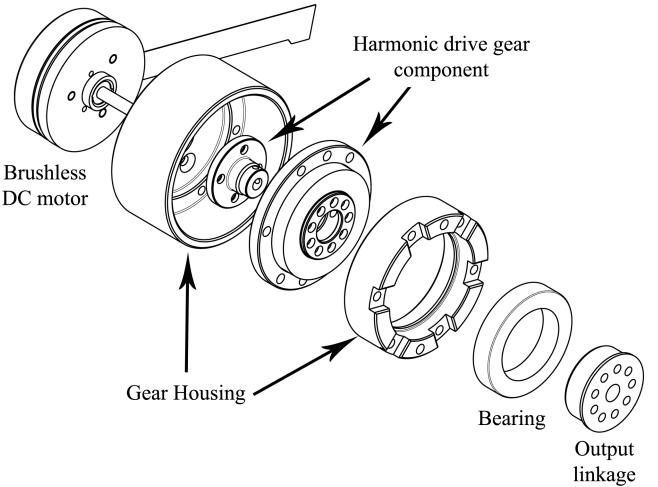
Gear housing was designed and manufactured to assemble DC motor and Harmonic drive gear components together. These components could be placed within the prosthetic hand.
